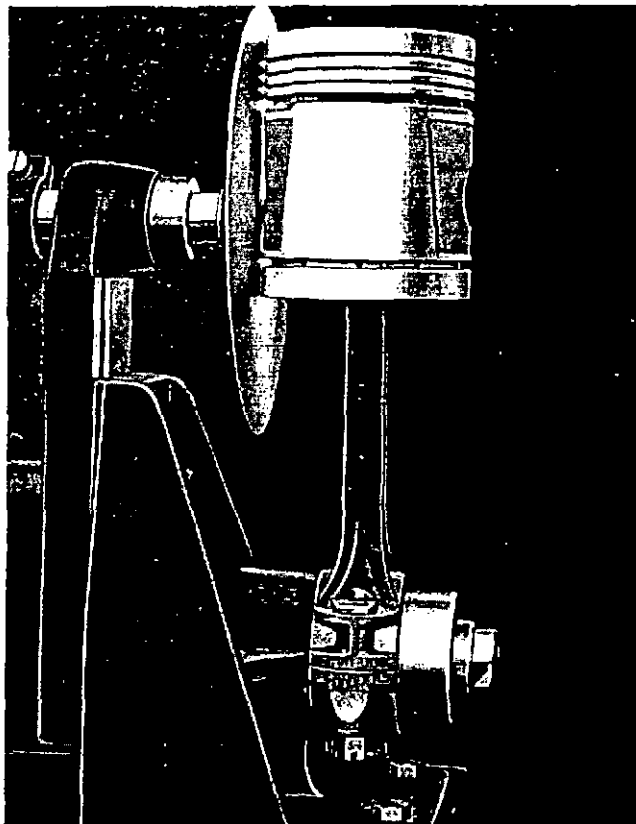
Checking Connecting Rod Assembly for Squareness and Twist
